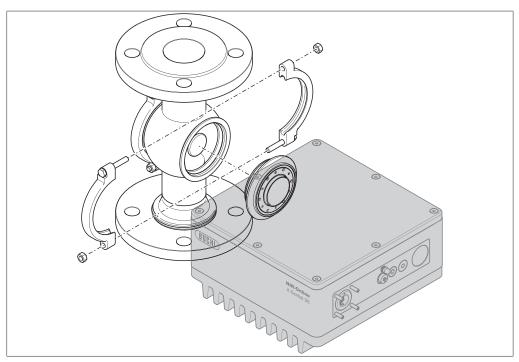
Fixing sensor with screws (hygienic inline flange)
